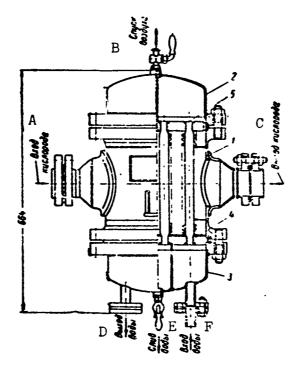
Cooler of first and second stages: 1) shell; 2) upper cover; 3) lower cover; 4) pipe grid; 5) ribbed pipe. A) Oxygen inlet; B) air discharge; C) oxygen outlet; D) water outlet; E) water discharge; F) water inlet.
